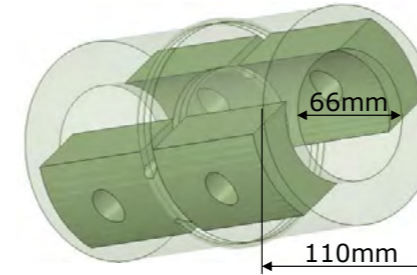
Location of the waisted tensile specimens in BF joints made in HDPE pipe samples
